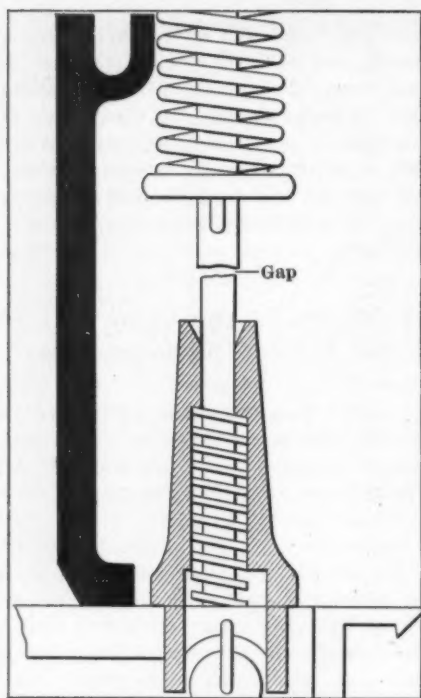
Showing worn valve stem—a frequent cause of falling off of power
